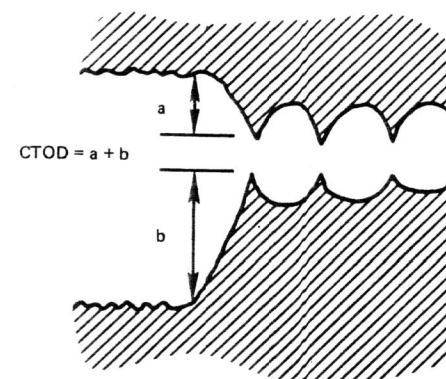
Fractographic Measurements of CTOD were made from Matching Fracture Surfaces
